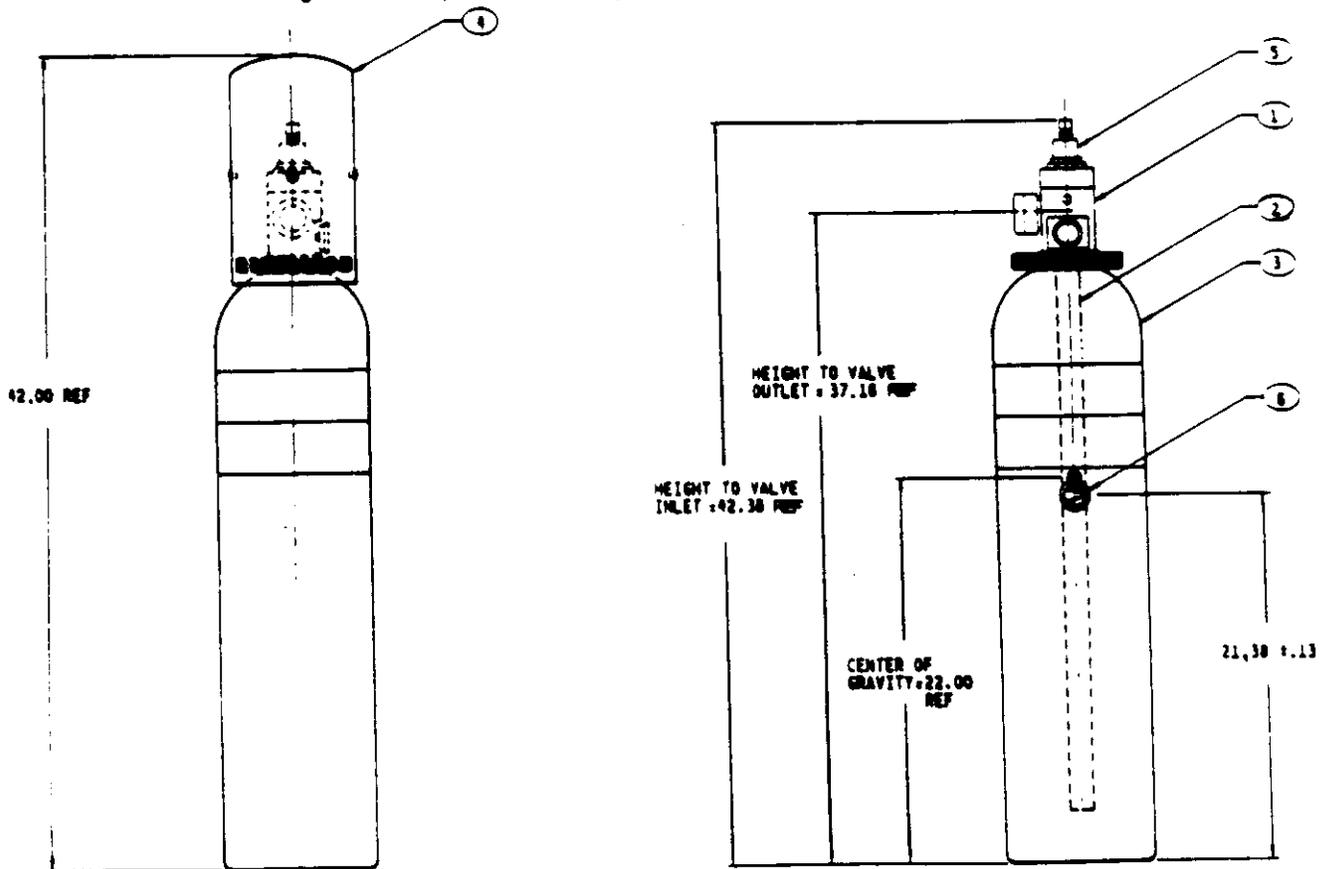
Cylinder Assembly, Halon 1301, 60 lb. Size 3, Class I
